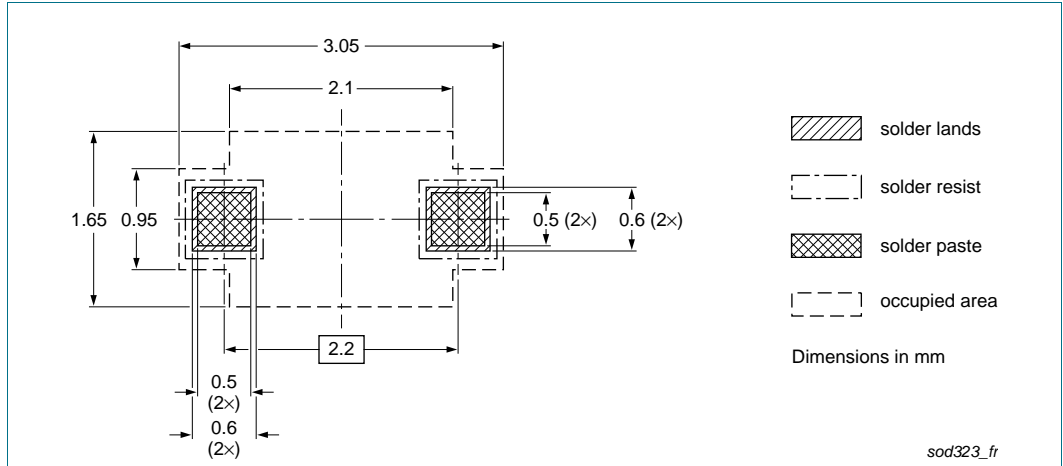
Reflow soldering footprint SOD323 (SC-76)
